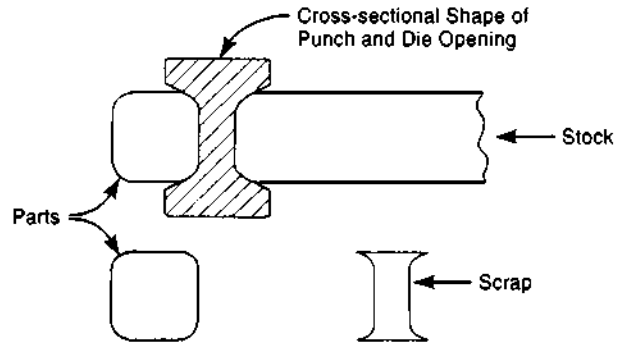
C4d A parting punch is used to make separate pieces from strip material when the end edges do not mate.
